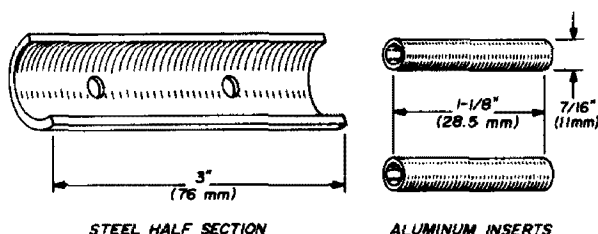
Mechanical parts required for clamping aluminum tubing without deforming it consist of two aluminum inserts and a steel half-section. Assembly of the parts is shown in fig. 2.
